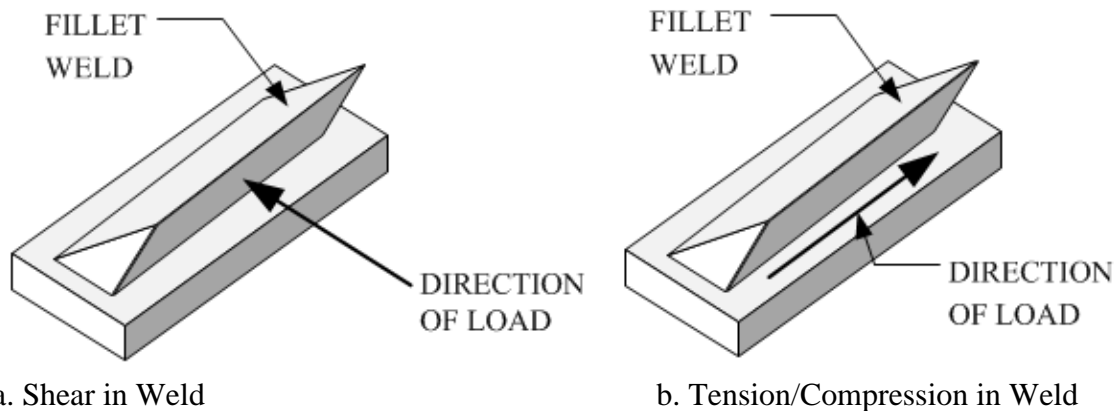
Weld Load Directions (AASHTO 6.13.3.2.4b)
